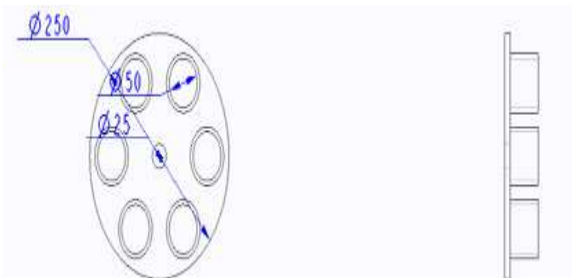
ROTATING TABLE 2D DESIGN
